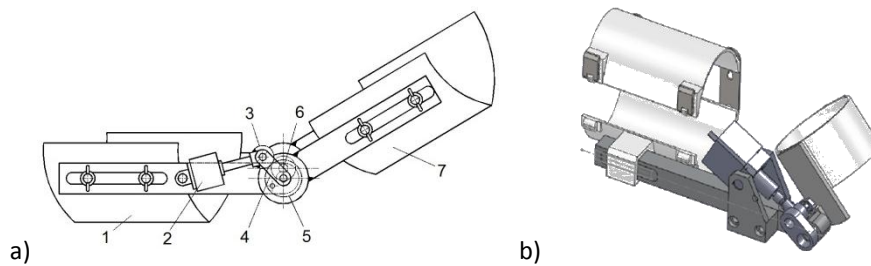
Schema (a) and design (b) of a haptic elbow arm exoskeleton module using geared linkage with linear stepper motor
